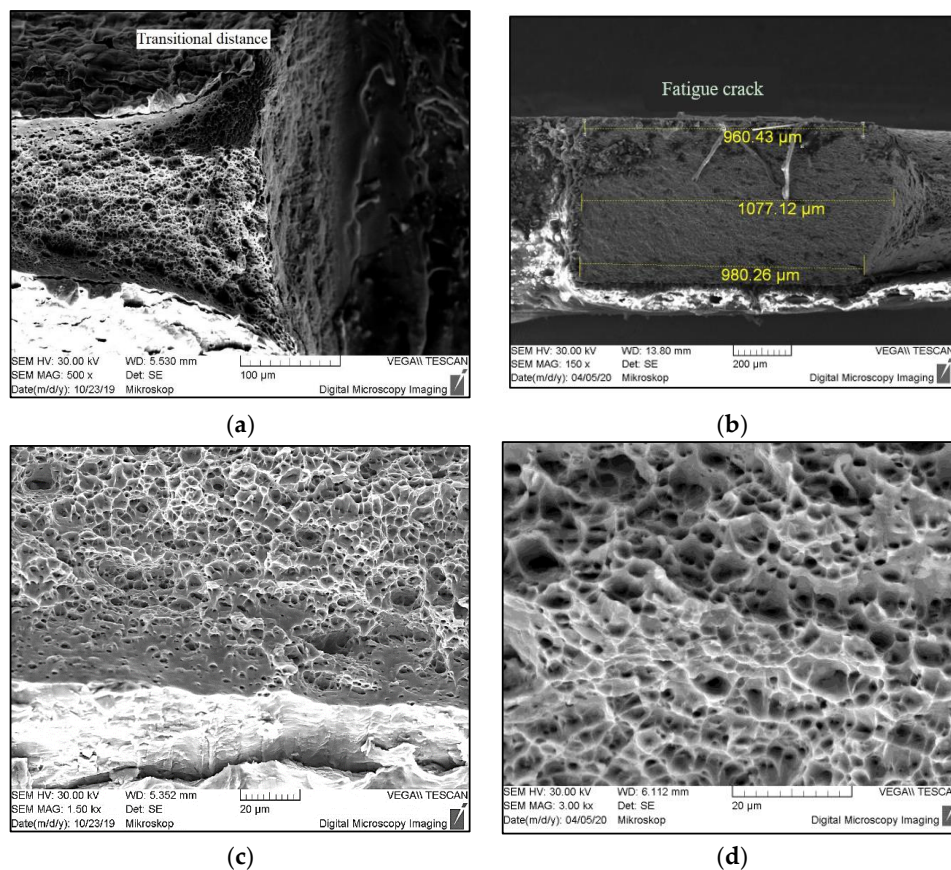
Scanning electron microscope (SEM) images of the fractured surface after essential work of fracture (EWF) testing: (a) Crack tip of a notched sample; (b) Crack tip of a fatigue pre-cracked sample; (c) Ductile and slant fracture at edge; (d) Flat and ductile fracture at centre.
